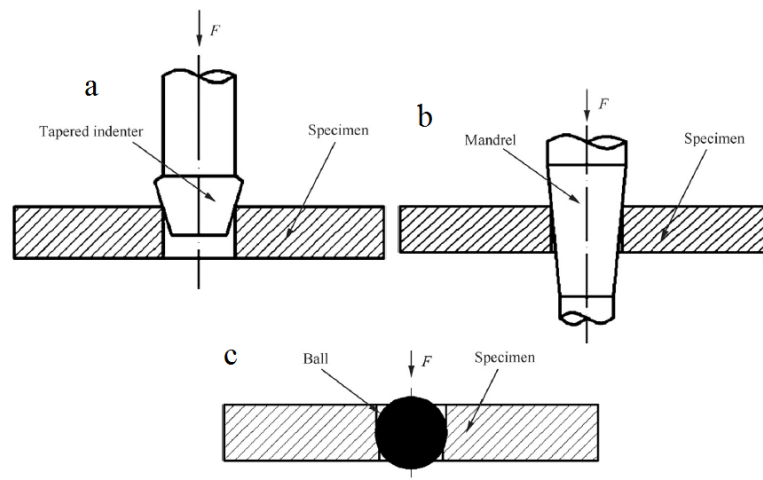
Cold expansion methods, a) hole edge expansion, b) tapered mandrel, c) ball expansion [10]
